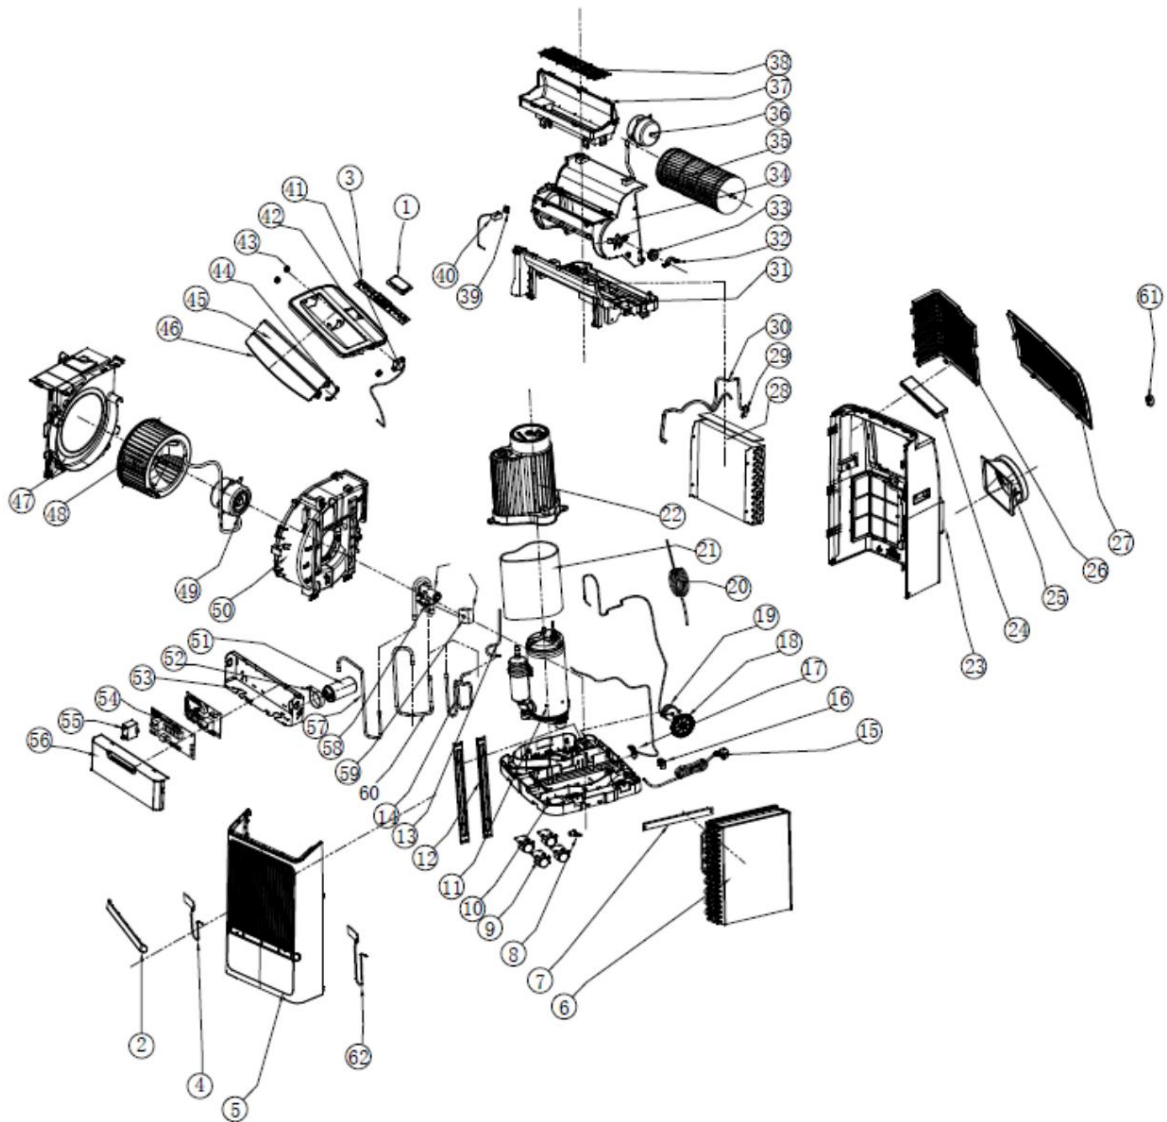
Spare parts drawing 1 - PAC 9001
